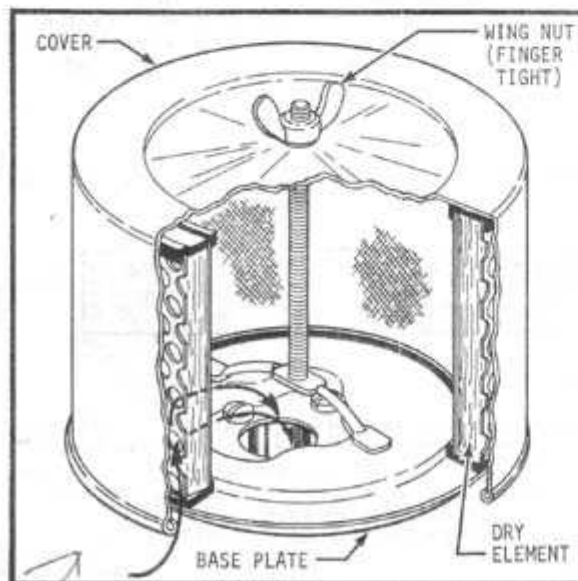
CUTAWAY VIEW--DRY AIR CLEANER
